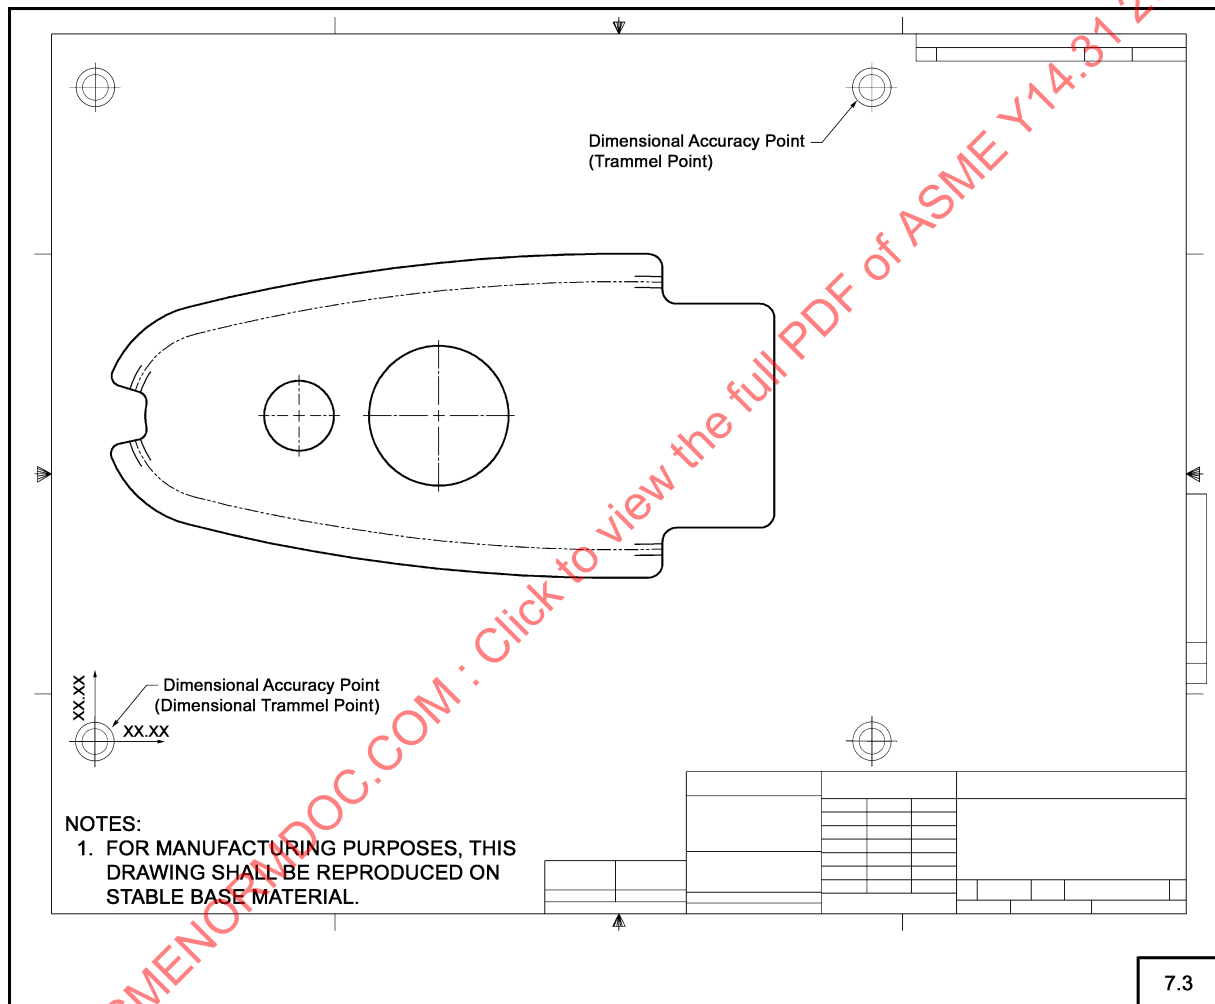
Dimensional Accuracy Point Example on Roll Drawing Form
